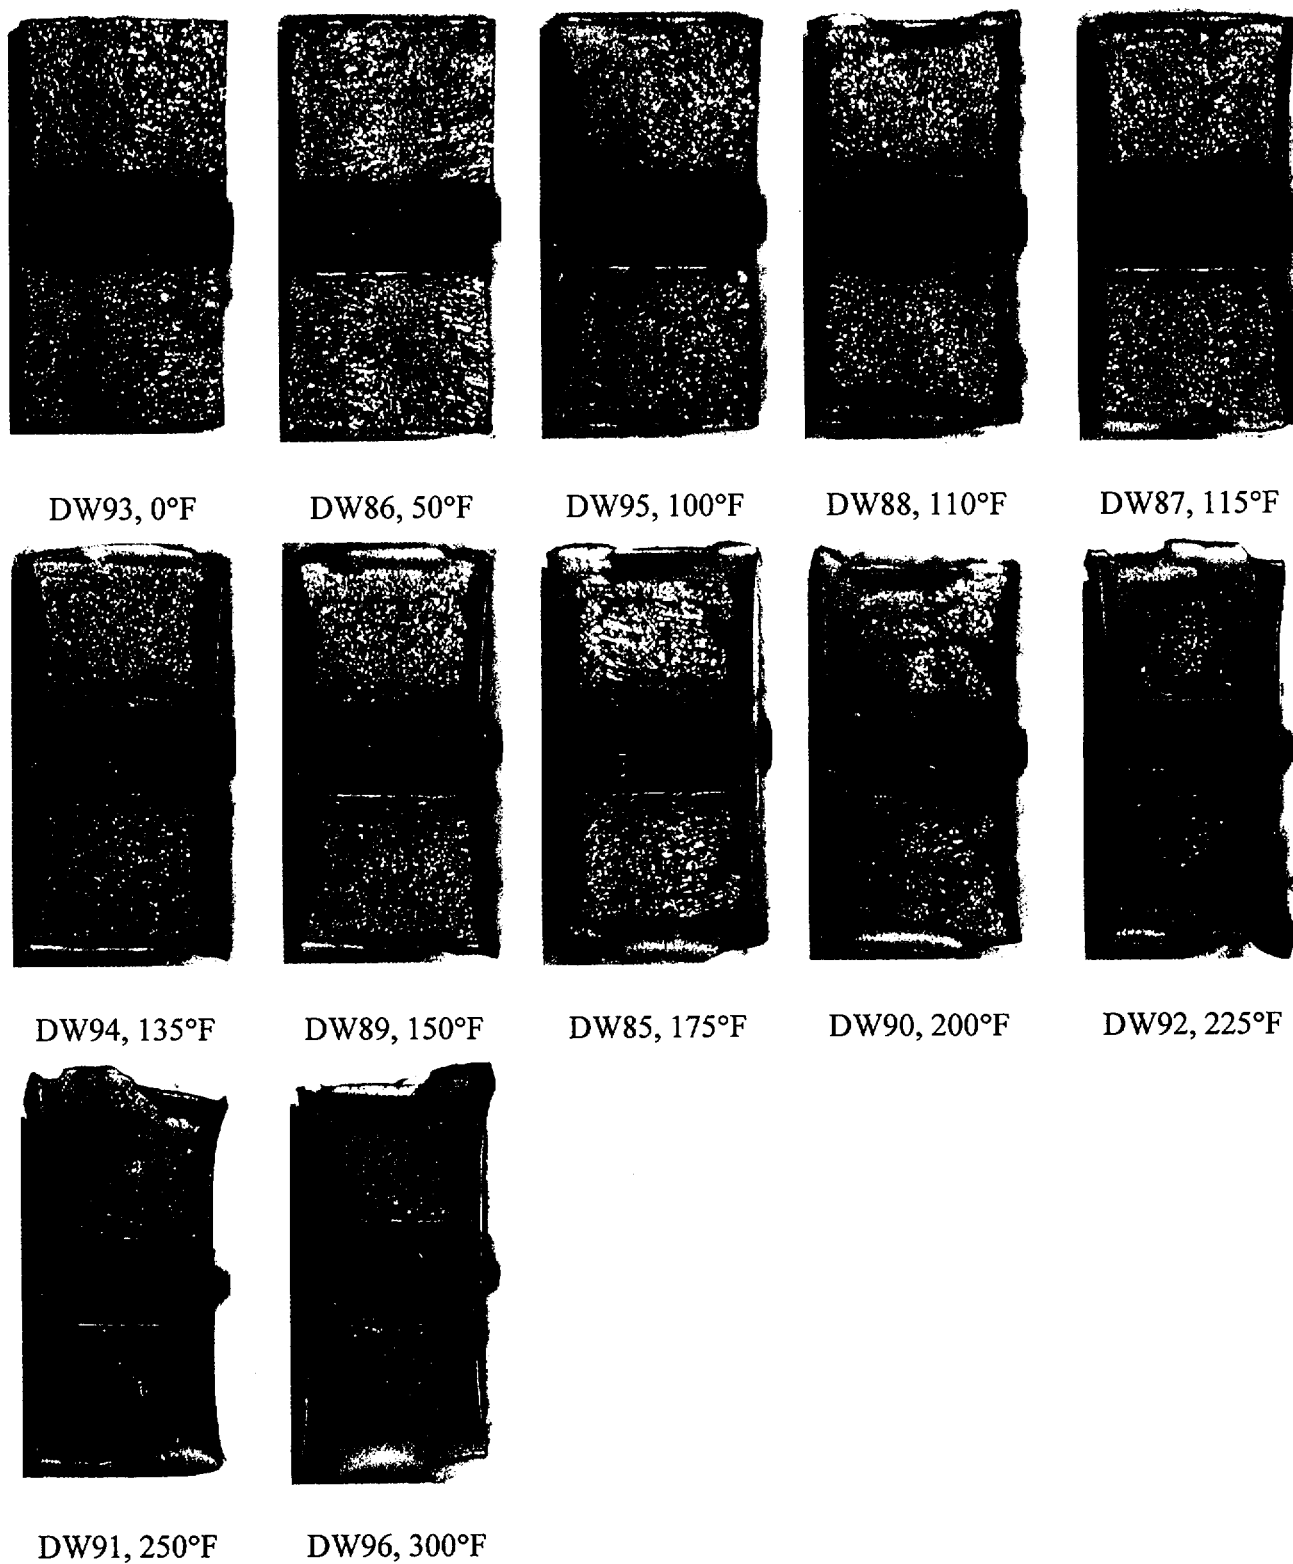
Charpy Impact Specimen Fracture Surfaces for Beaver Valley Unit 1 Reactor Vessel Weld Metal Specimen
